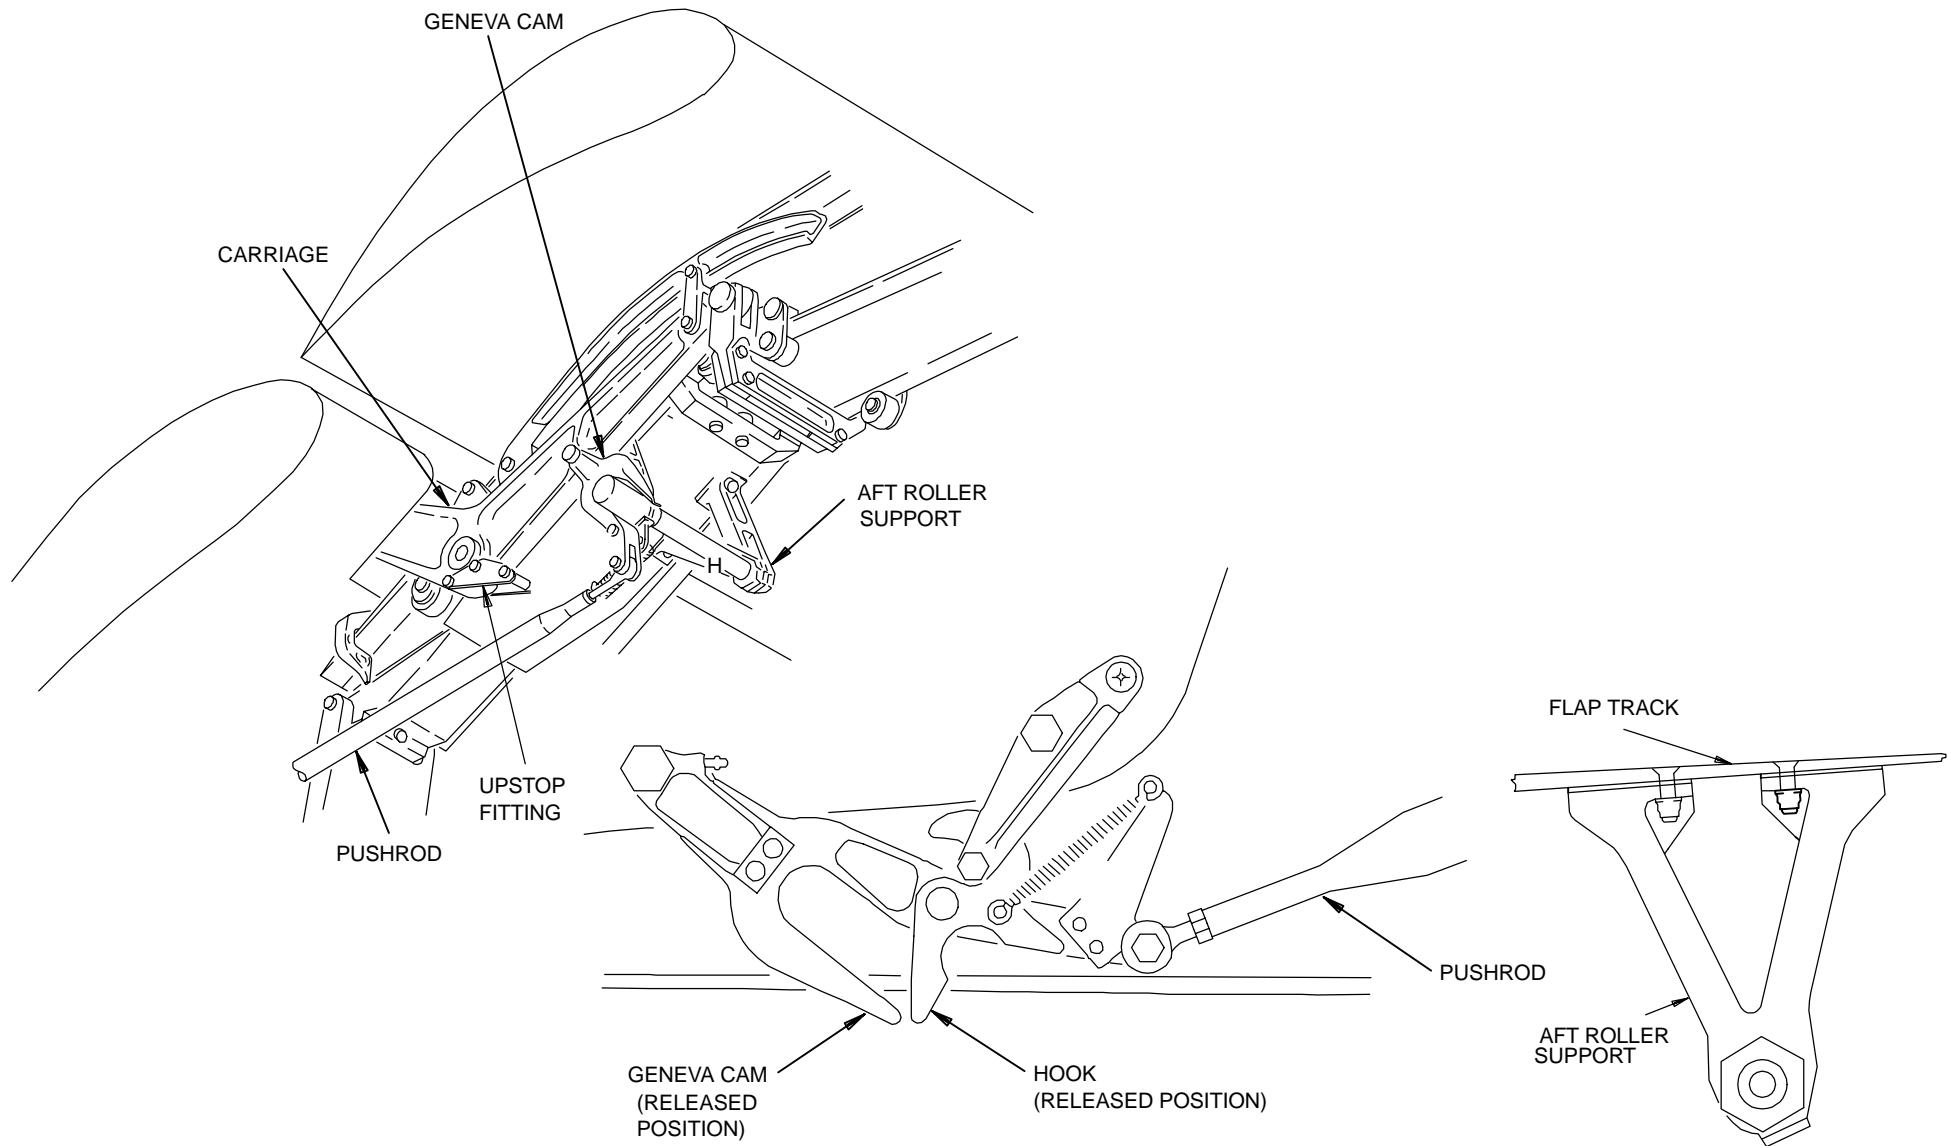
AFT FLAP DRIVE MECHANISM ASSEMBLY
